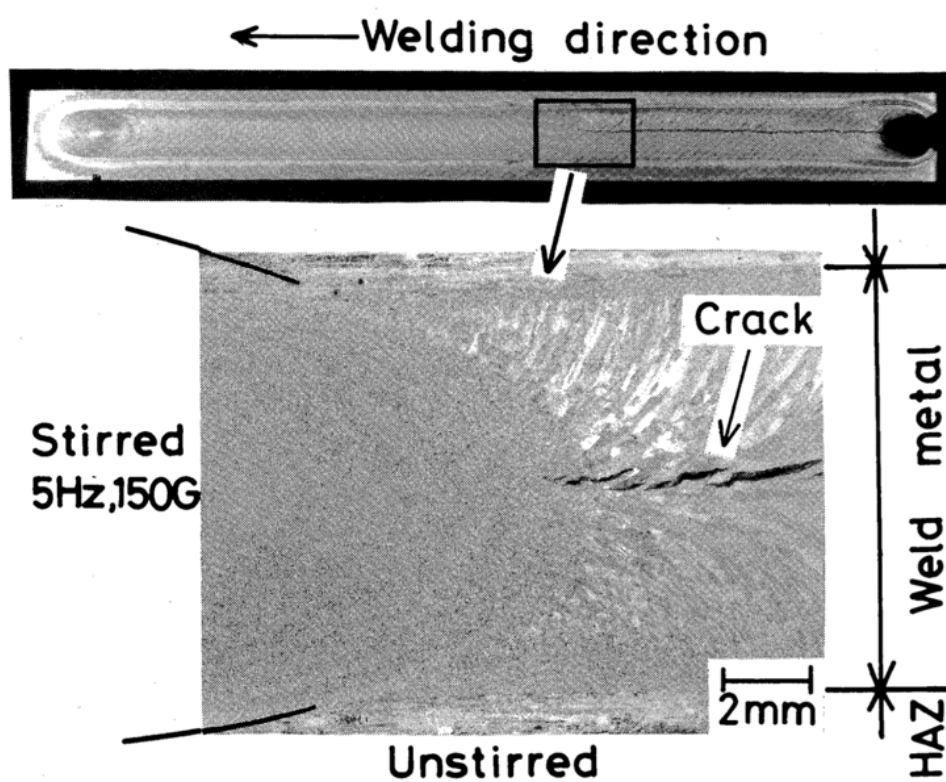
General appearance of weld bead surface showing macrostructural change caused by electromagnetic stirring applied on the way of welding.²¹⁾
